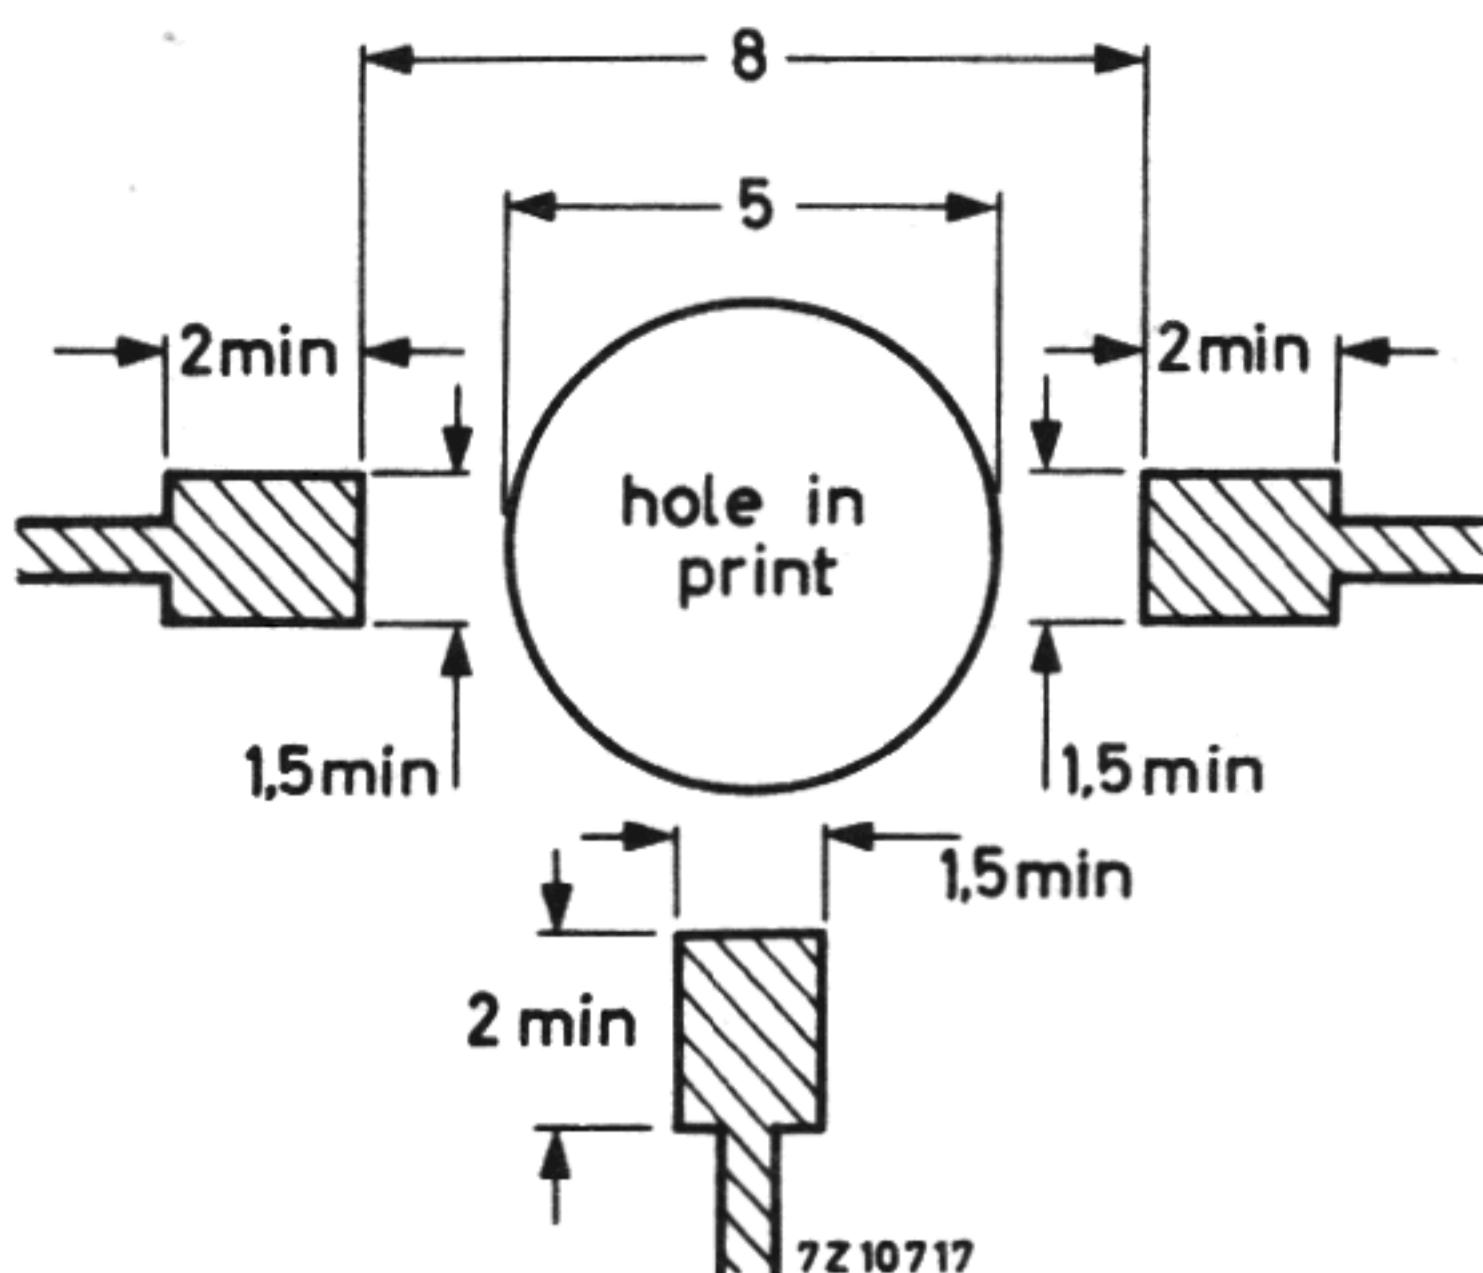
Requirements for fibre-glass print. (Dimensions in mm.)
